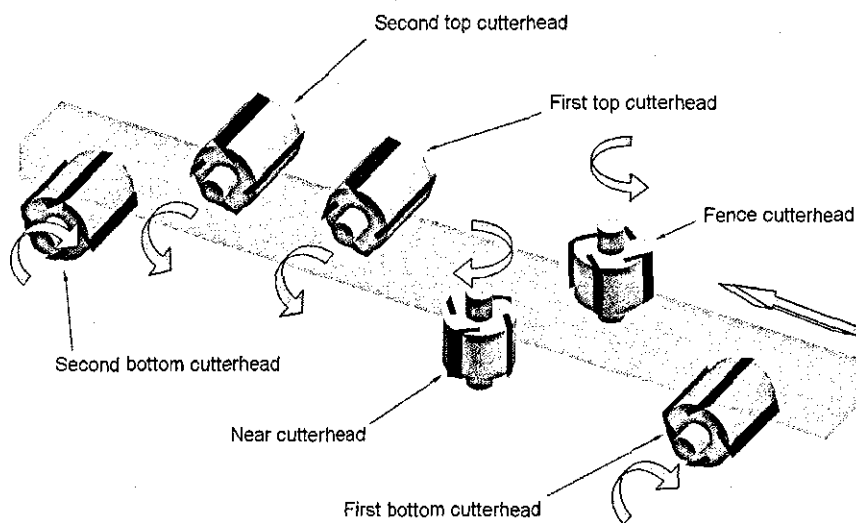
A typical modern moulder with six spindles (Hynek 2004)
